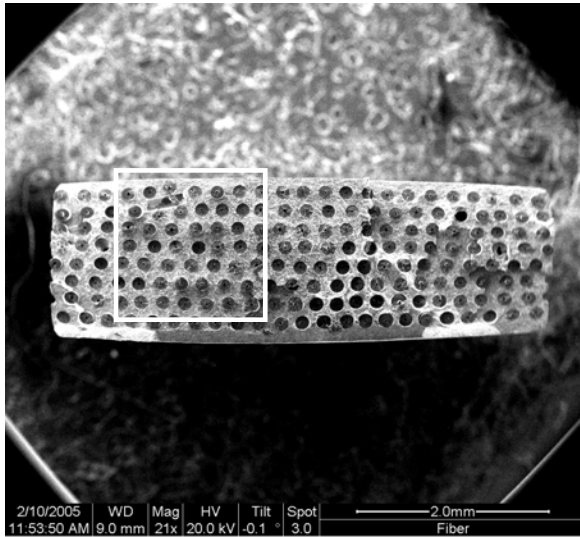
Specimen TMC-01, overall view of fracture surface
